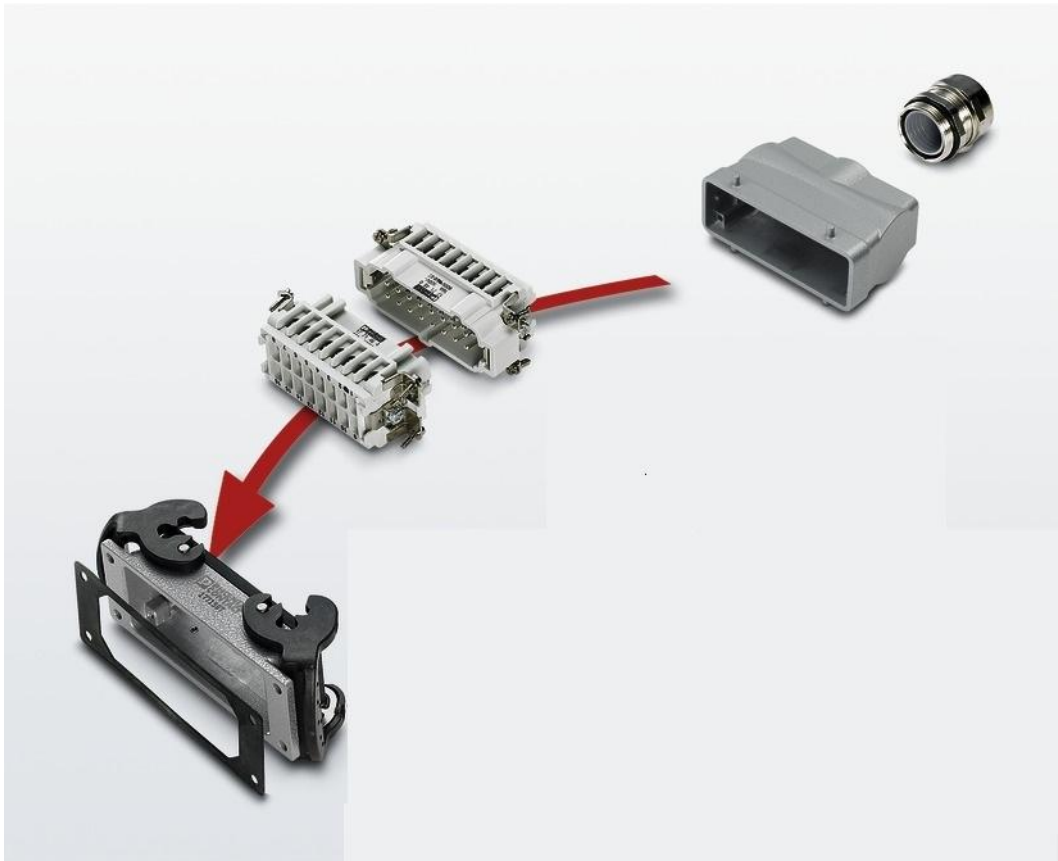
Single socket and plug B-Housing installation type. A bigger mounting base is needed. /18/
